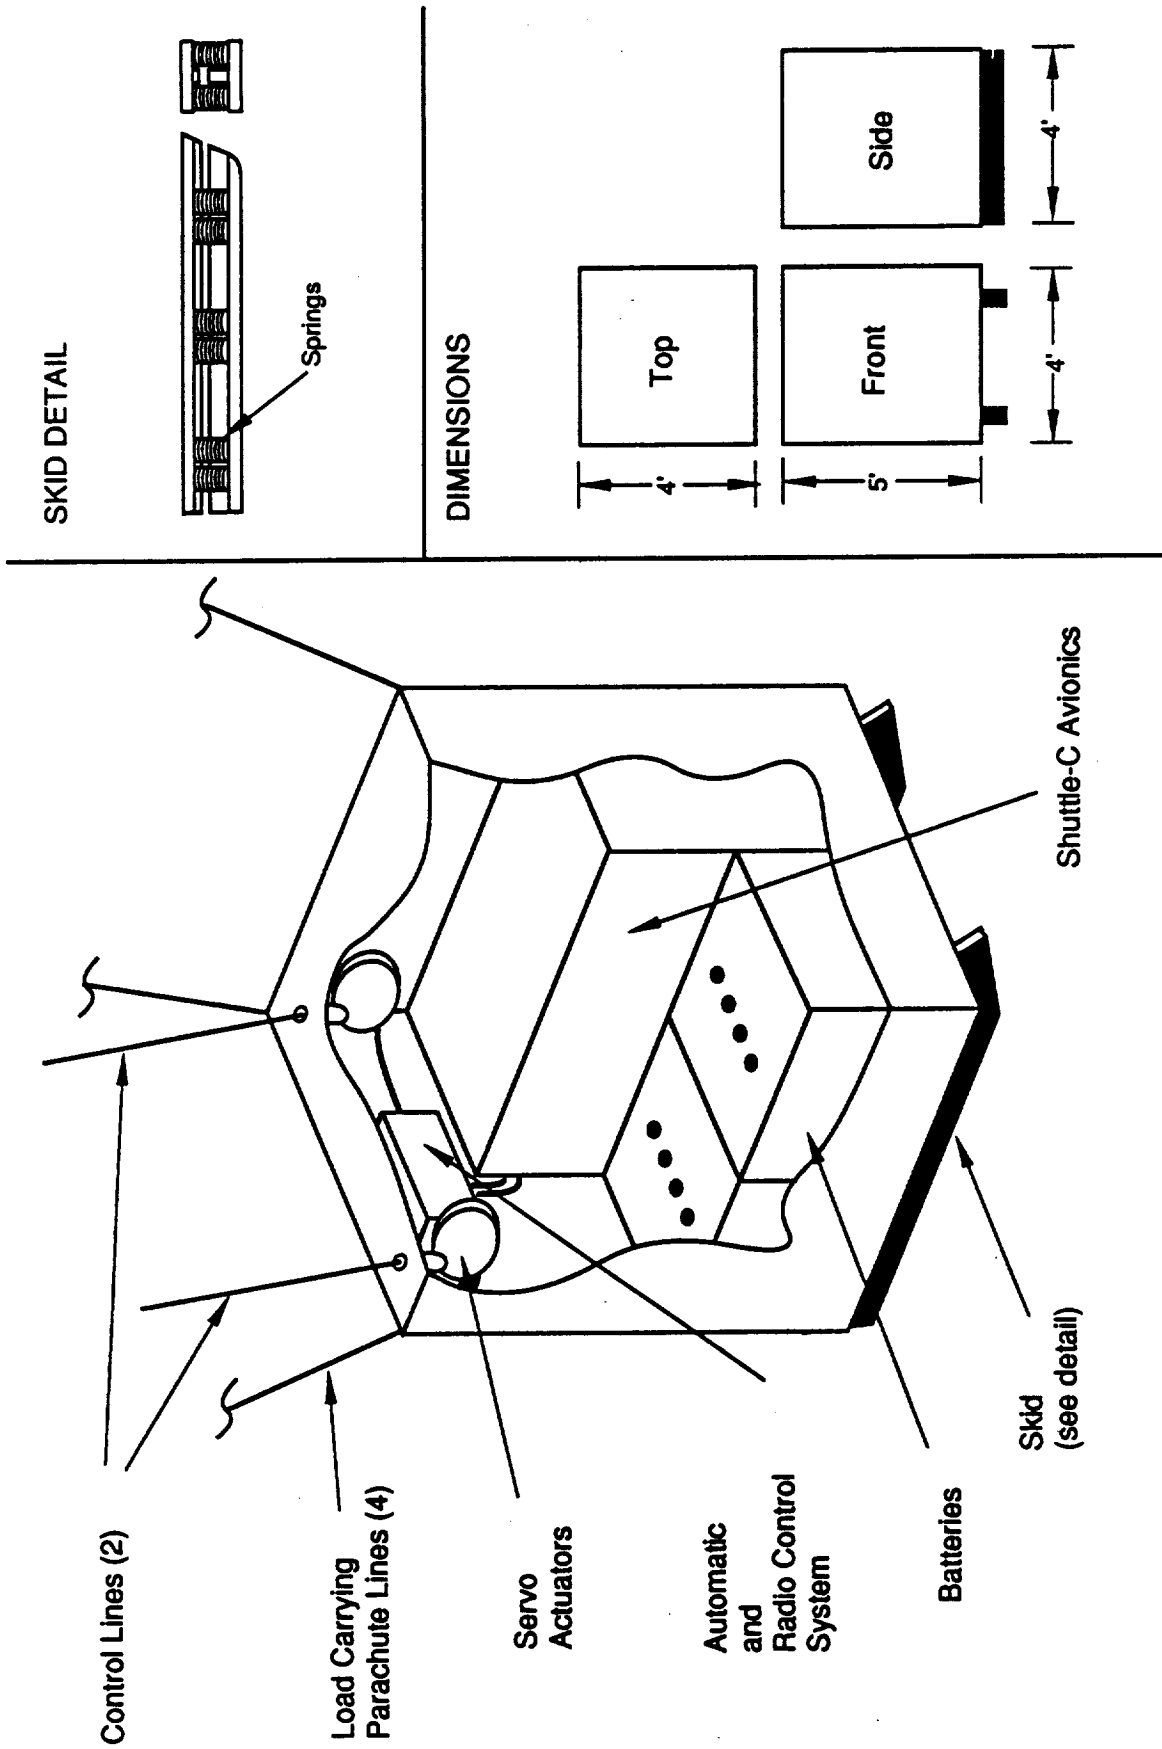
Avionics Module Cutaway View With Skid Detail and Dimensions.
